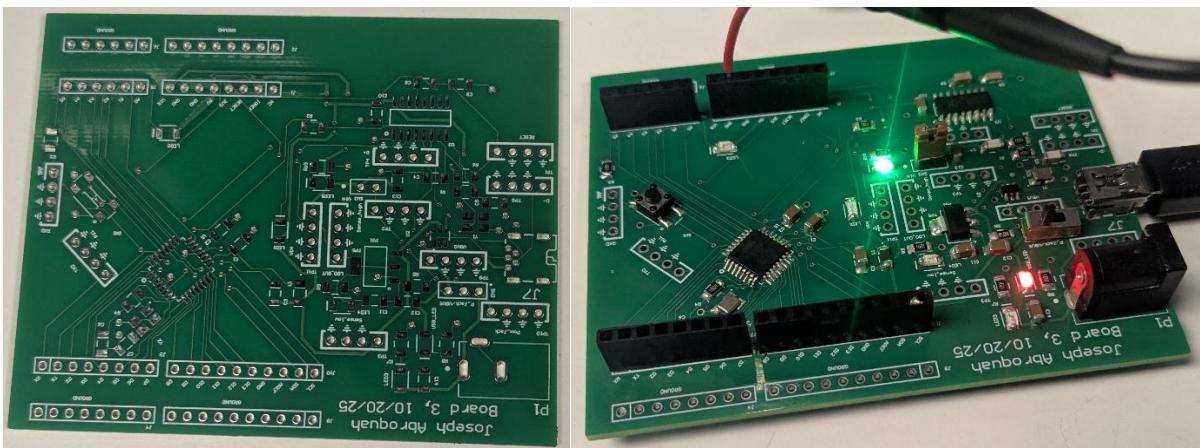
Fabricated (unassembled) board on the left and assembled board on the right
